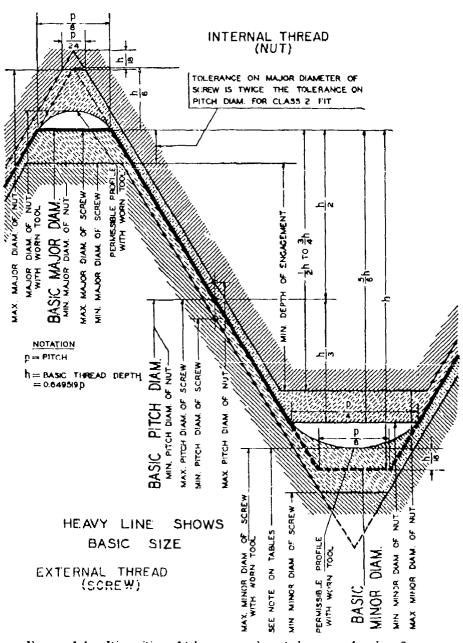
Disposition of tolerances and crest clearances for class 3.
